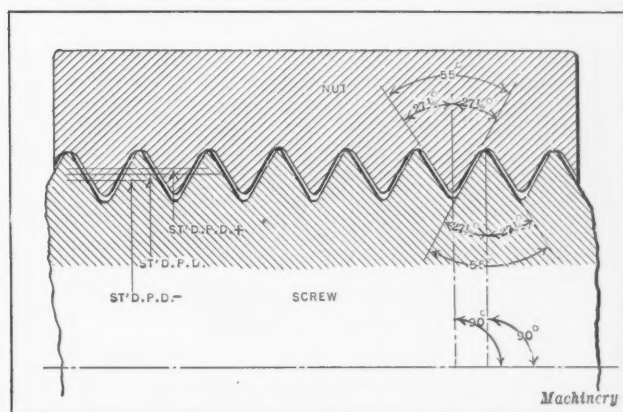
Correct Lead and Thread Angle in Both Nut and Screw; Same Outside Diameter in Nut and Screw, but too Great Pitch Diameter in Nut or too Small Pitch Diameter in Screw
